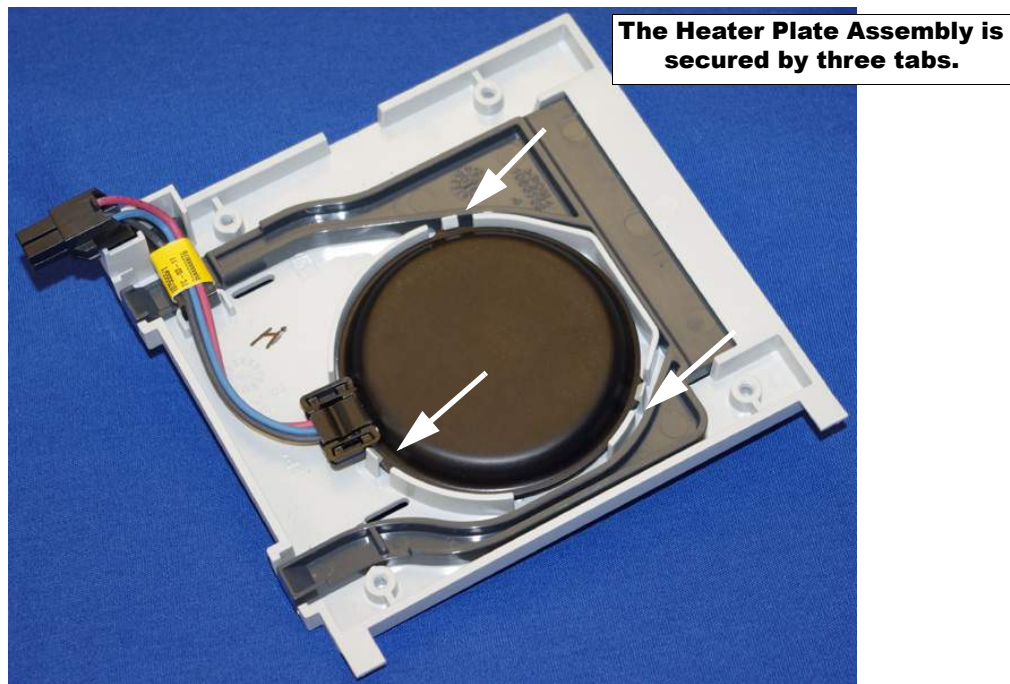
HEATER PLATE ASSEMBLY
